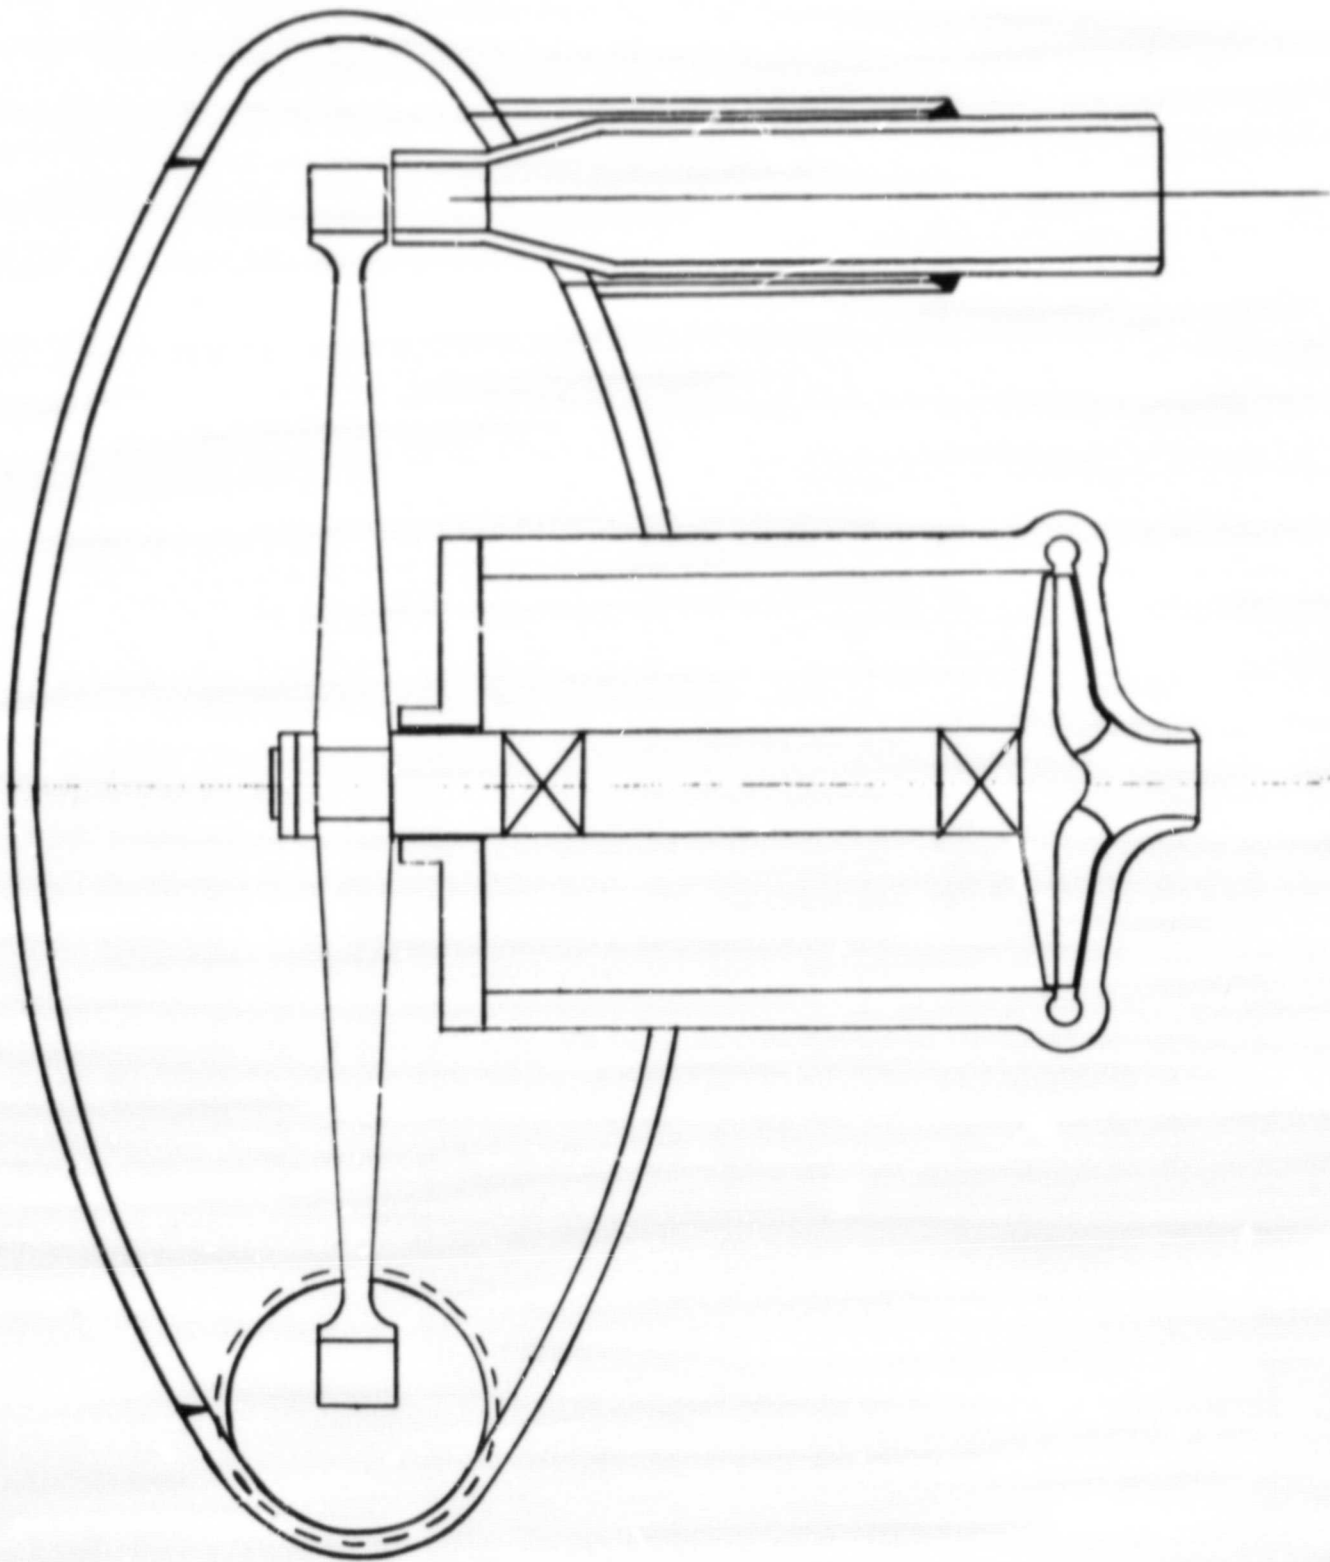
Cross Section of the Preliminary Design of the Free Turbine-Driven Pump for Potassium Boiler Feed Application. Shaft speed, rpm - 12,000; Turbine wheel diam, in. - 12.0; Impeller diam, in. - 4.7; Turbine-pump weight, lb - 147.
